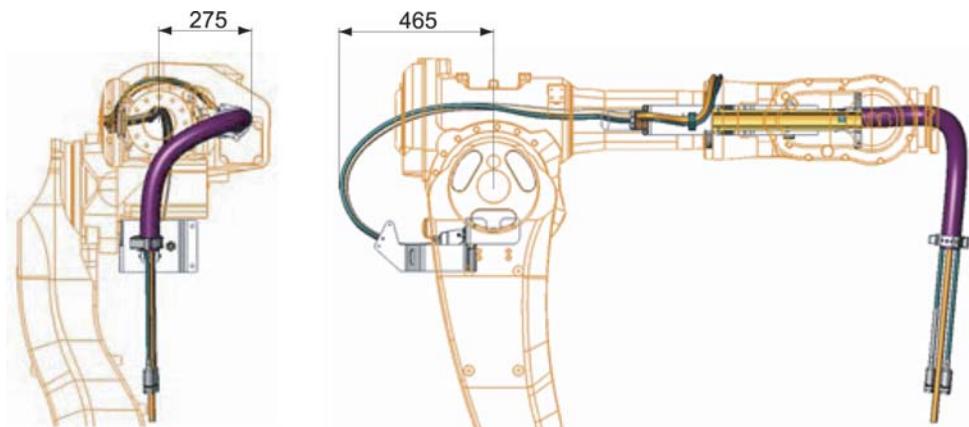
External routing Material Handling, option 798-1 and 780-3 (Dimensions in mm).
